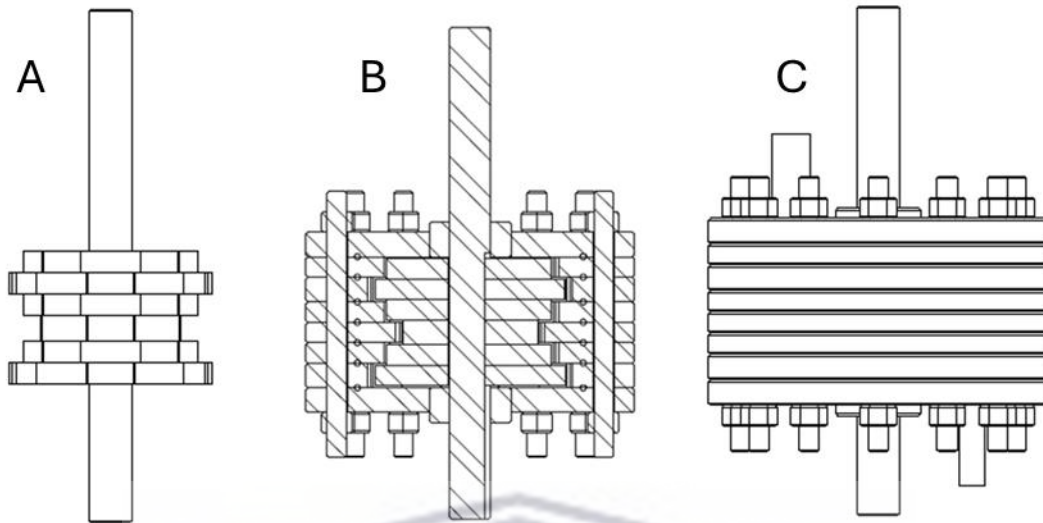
Arrangement of the shear unit assembly's internal components [208].
